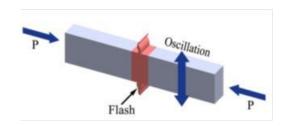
Linear Friction Welding Process, (Li, et al, 2012)
